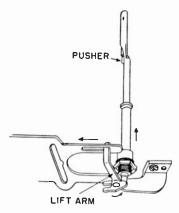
The ejector link assembly shown above is used for dropping the record.
